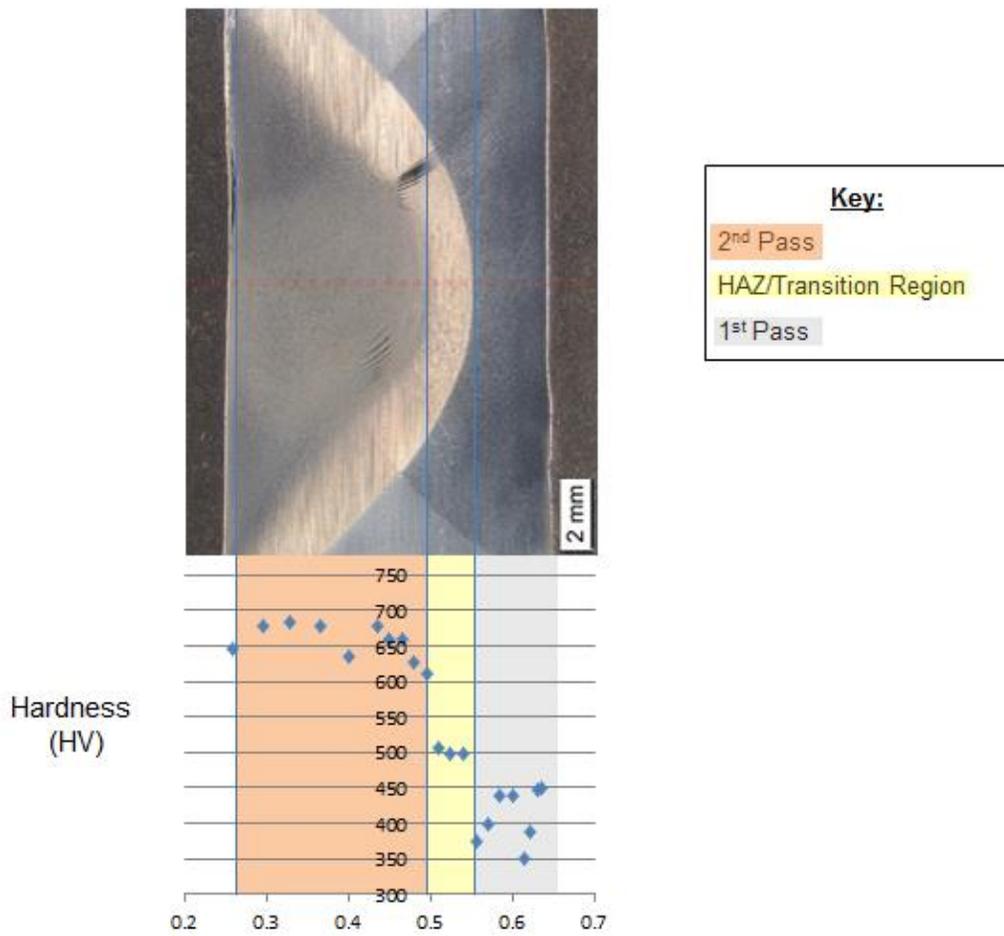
Vertical hardness profile of a double pass weld.
